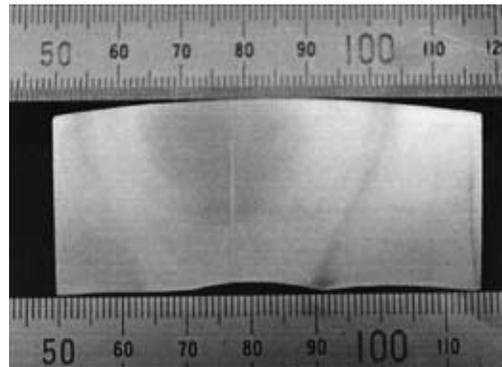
Cross section of ERW welded seam (API 5LX56 OD26" × WT25.4 mm)
